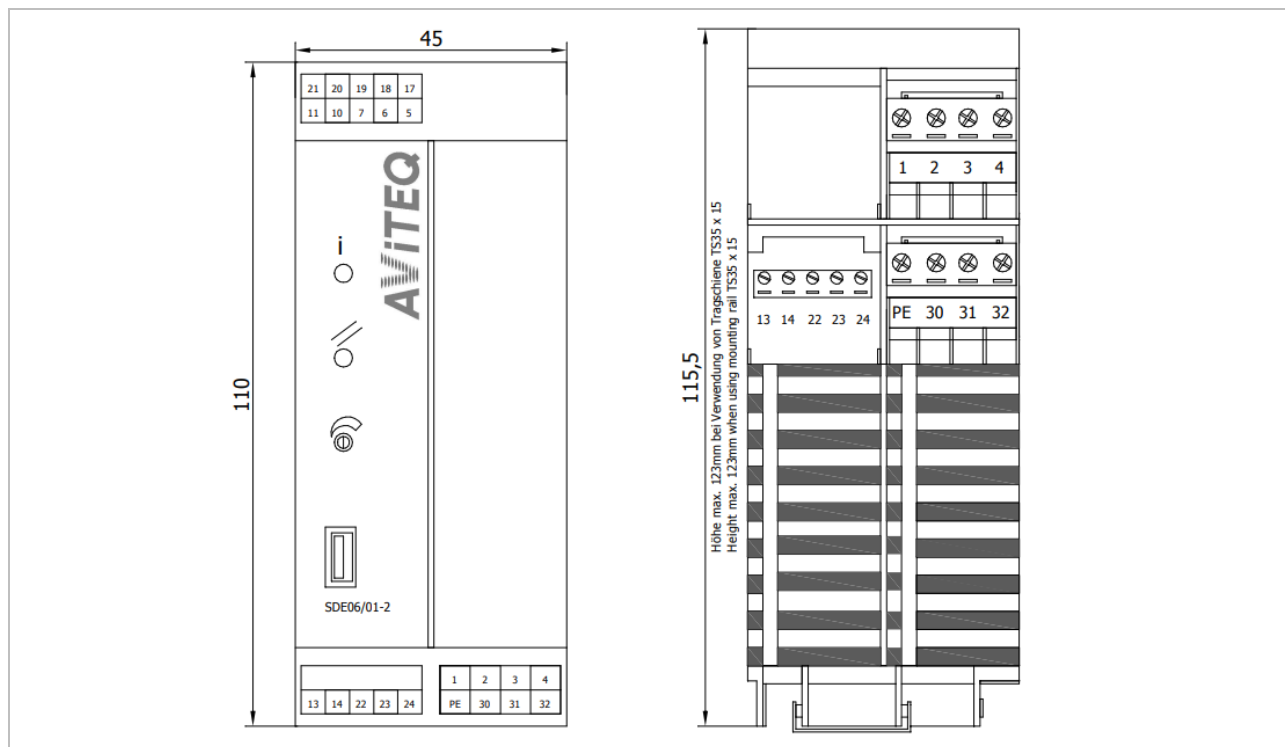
Dimensions SDE06/01-2 – left front view - right bottom view
